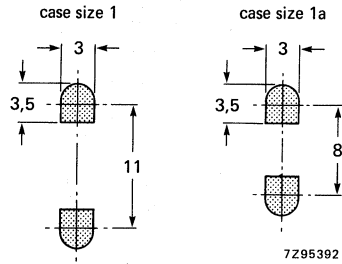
Recommended dimensions of metal connection pads on printed-circuit board or substrate surface.
